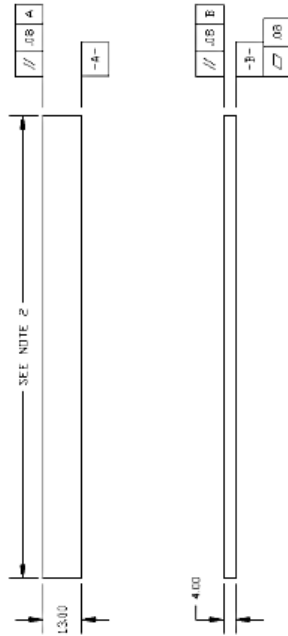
Standard Flexural Test Specimen Drawing (SI)
